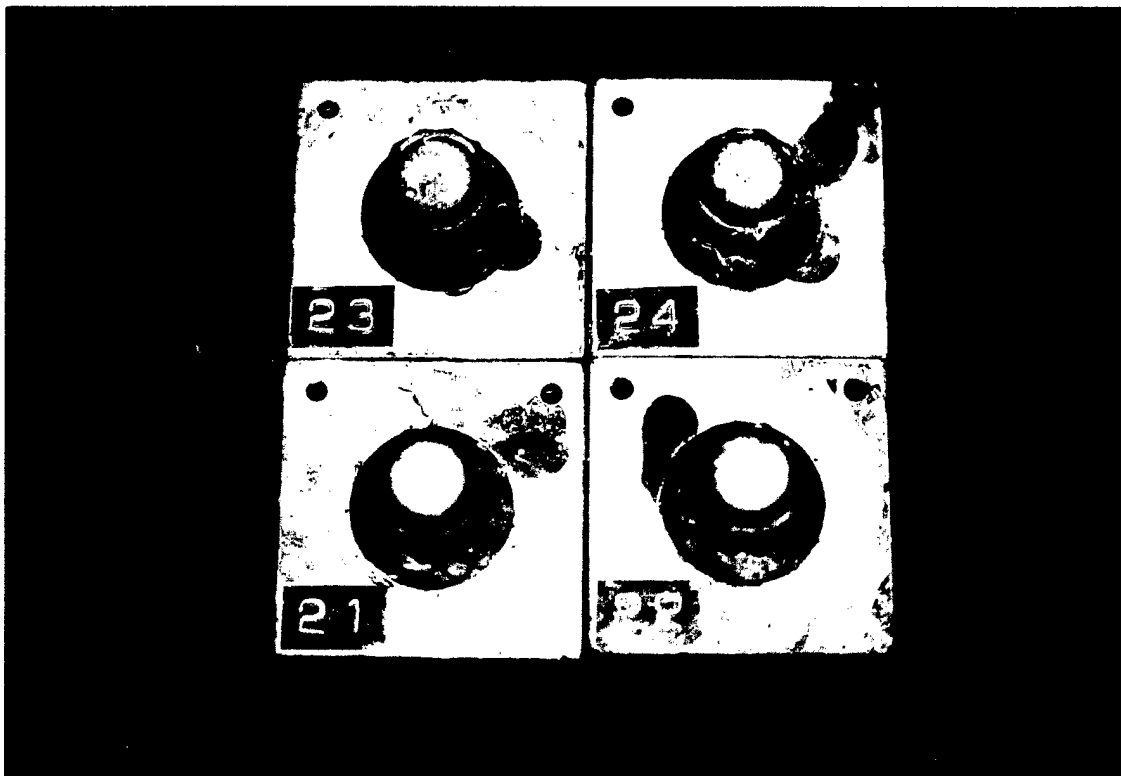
H11 Chromium Hot Work Tool Steel Nuts With Cadmium Electroplate After 62 Days of Salt Spray. Reduced 25%.
